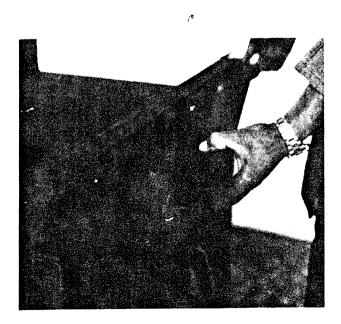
Hang door moulding onto the mounting pins above the doors. (Start on top of boiler)
